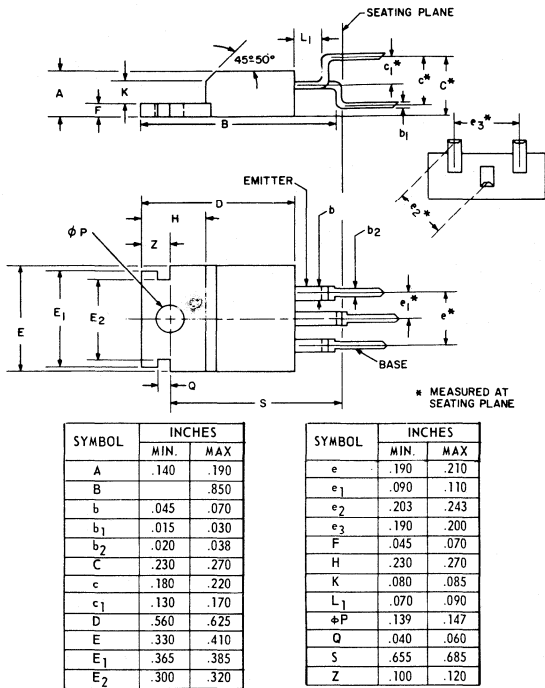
Dimensional outline of Versawatt transistor package designed for mounting on printed-circuit boards.
